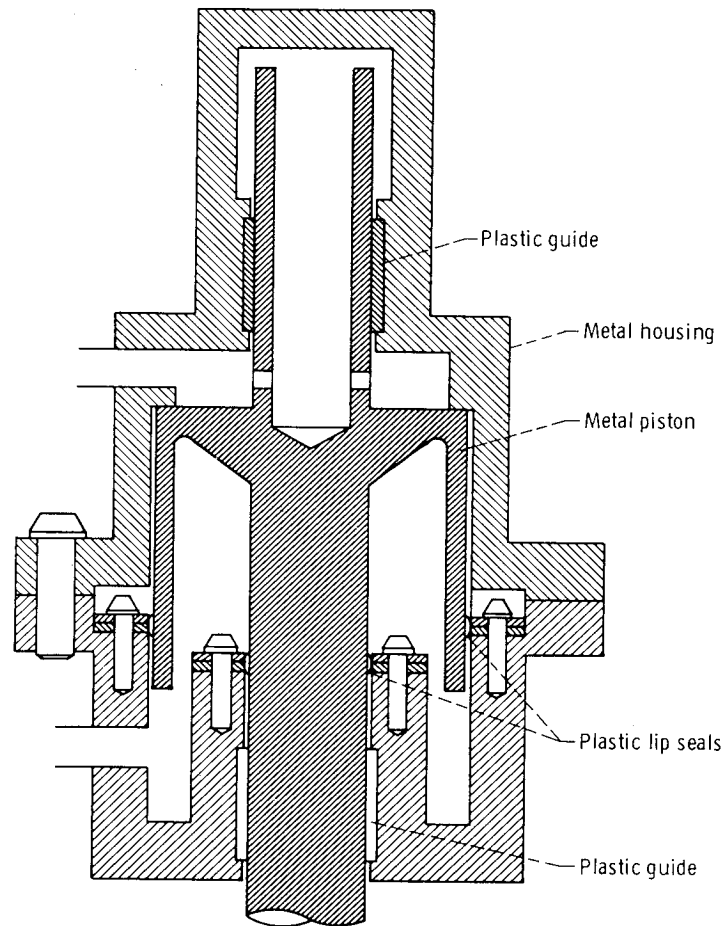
Schematic of actuator with nonmetal seals and guides combined with metal housing and piston.
